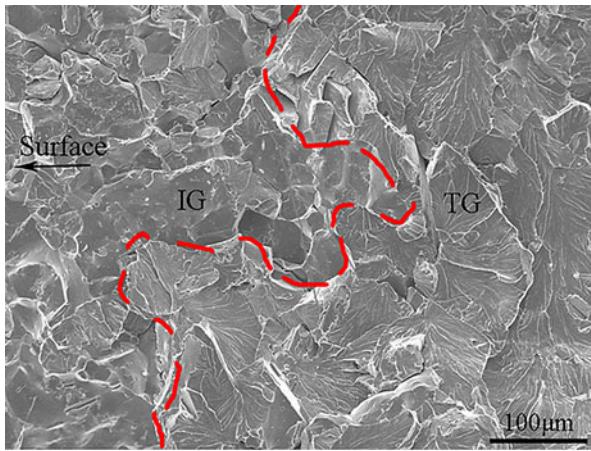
Fracture surfaces of the steels without TMT. The samples were heated at 1273 K (1000 °C) in air for 1 h and then quenched in water. The as-quenched specimen was aged at 773 K (500 °C) in air for 200 h. The picture shows that near the sample surface, the fracture surface is dominated by intergranular fracture. In the alloy interior, the fracture mode changed from intergranular (IG) to transgranular (TG).
